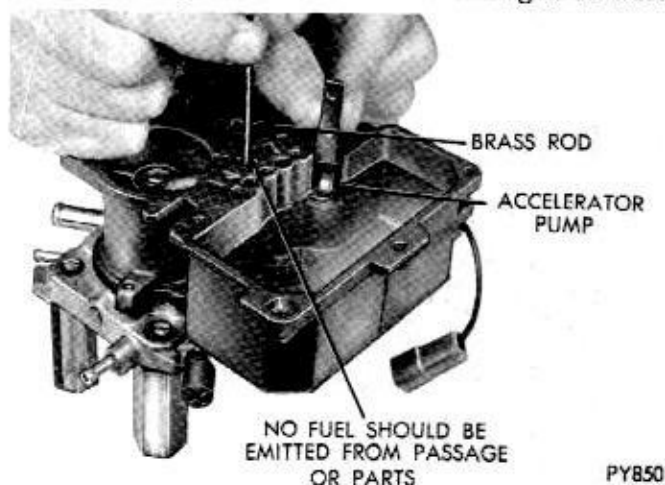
Testing Accelerator Pump Discharge Check Needle
